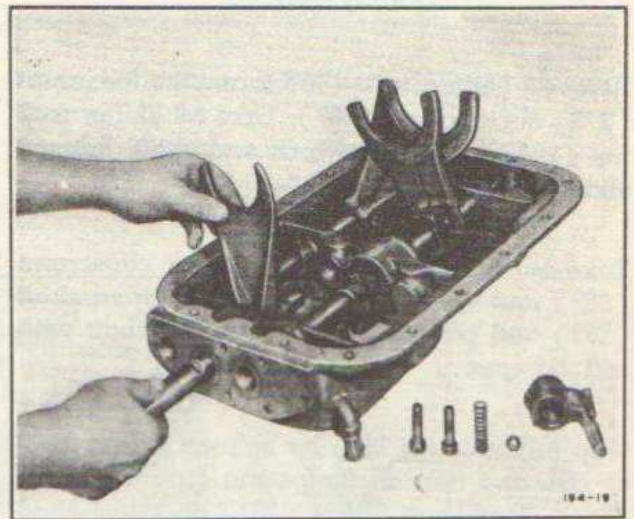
Removing Shifter Shaft, Shifter, Fork, Poppet Ball and Spring
